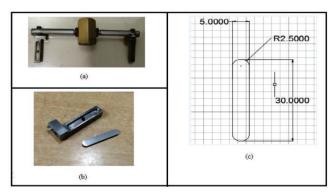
Sample Holder with test specimen (b) Test Fixture and Test Specimen (c) CAD drawing of test specimen
